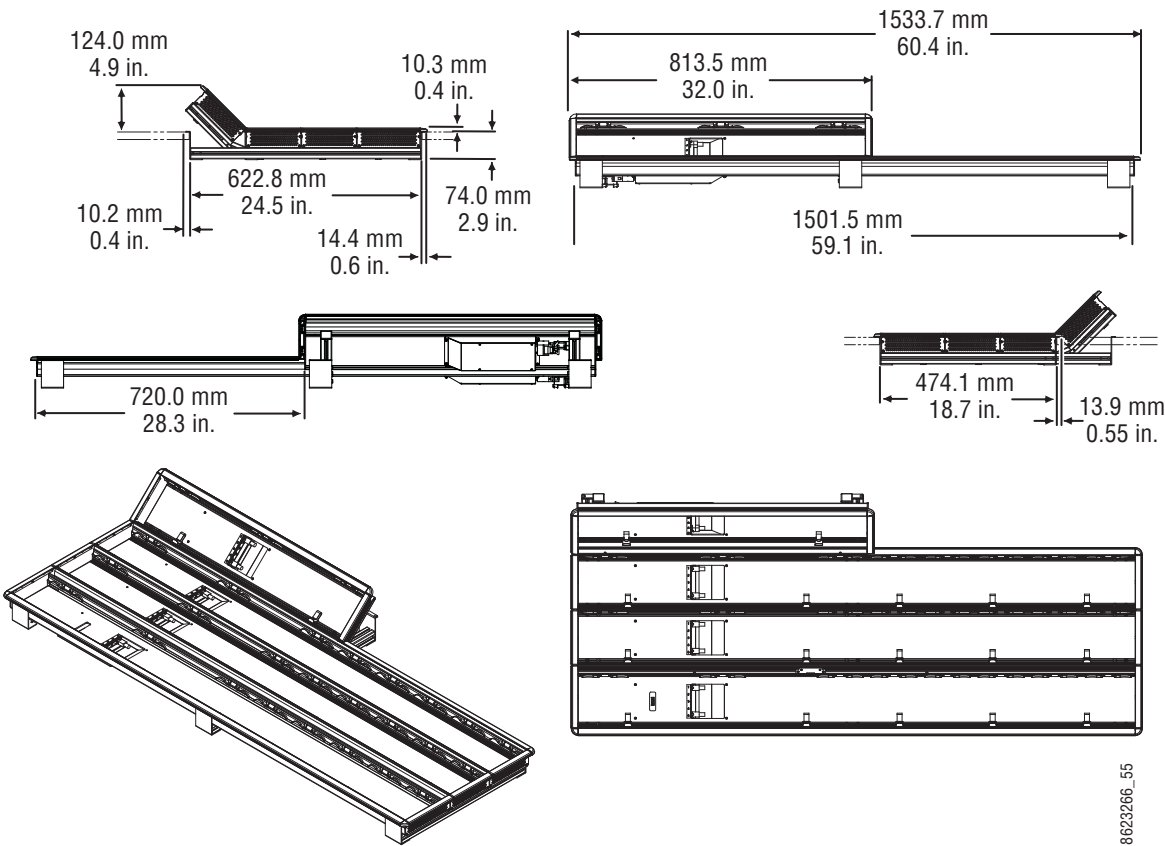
3-ME Control Panel Cutout Dimensions, Flat Installation
